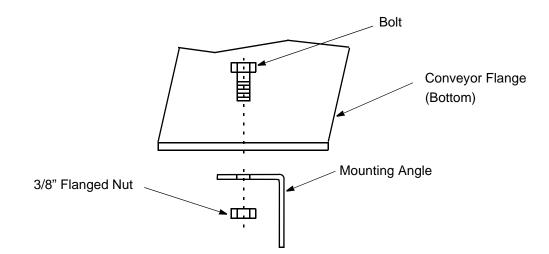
Attach Mounting Angle to Bottom Flanges
